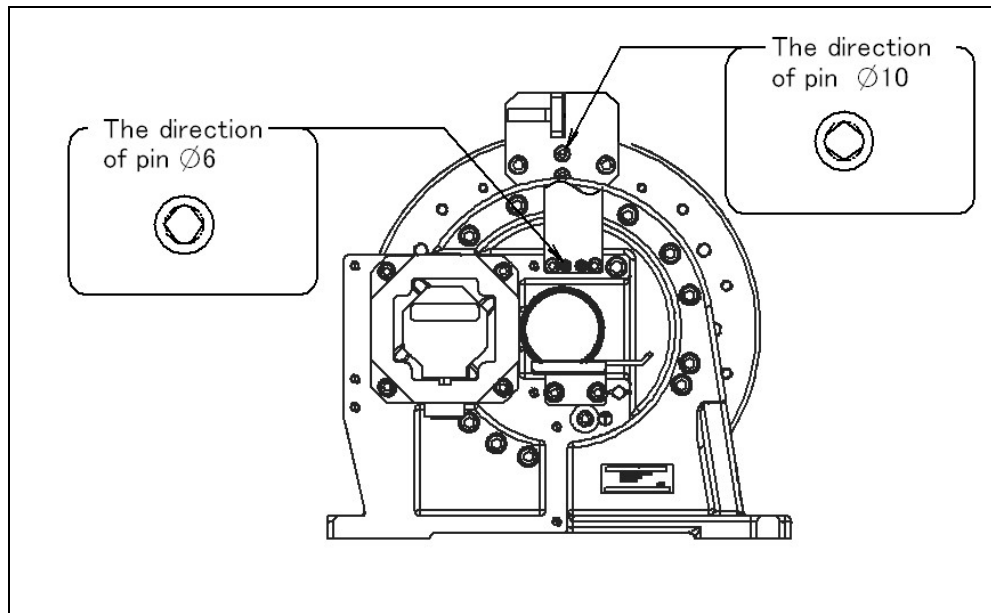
(b) Attaching the mastering fixture to the 1-axis positioner (300kg payload (hollow type)), (300kg/500kg payload (Hollow type))
